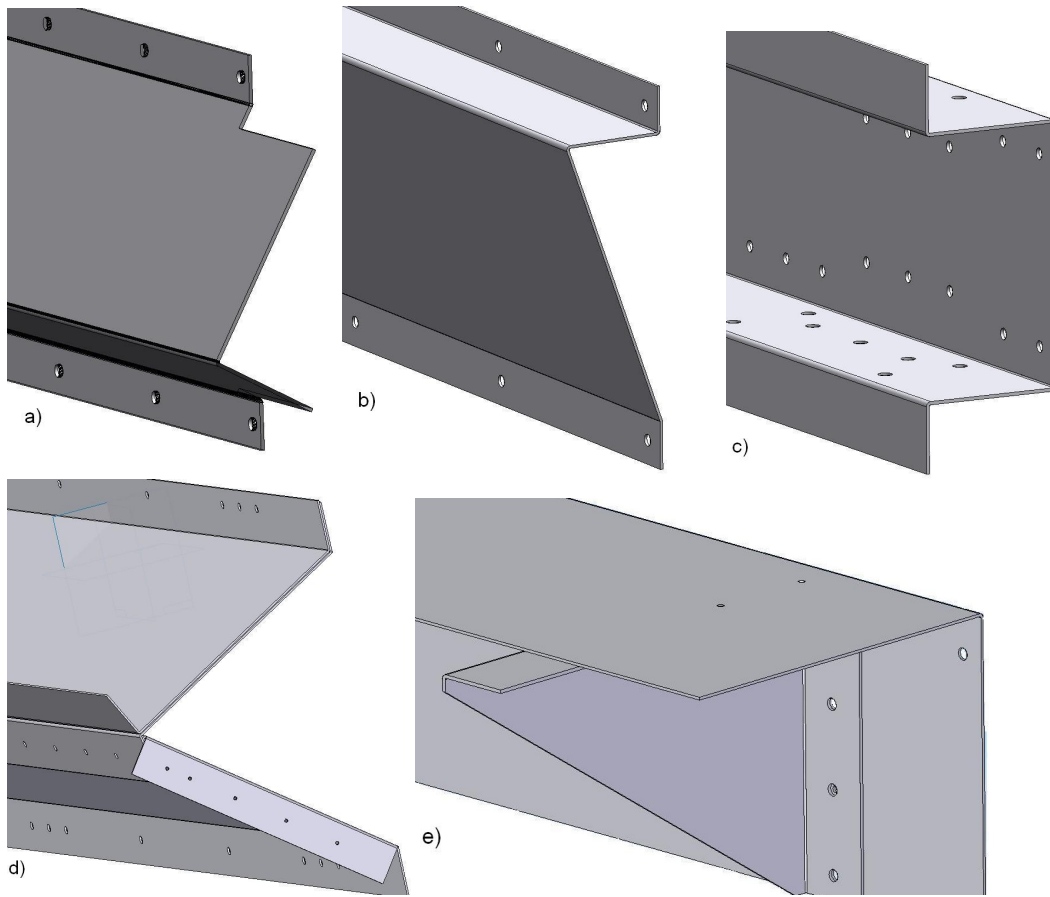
Various types of brackets used in mounting conditioning equipment: a) top coil mount b) blower nozzle plat mount c) front coil hanger mount d) bottom coil mount e) damper and heating coil mount
